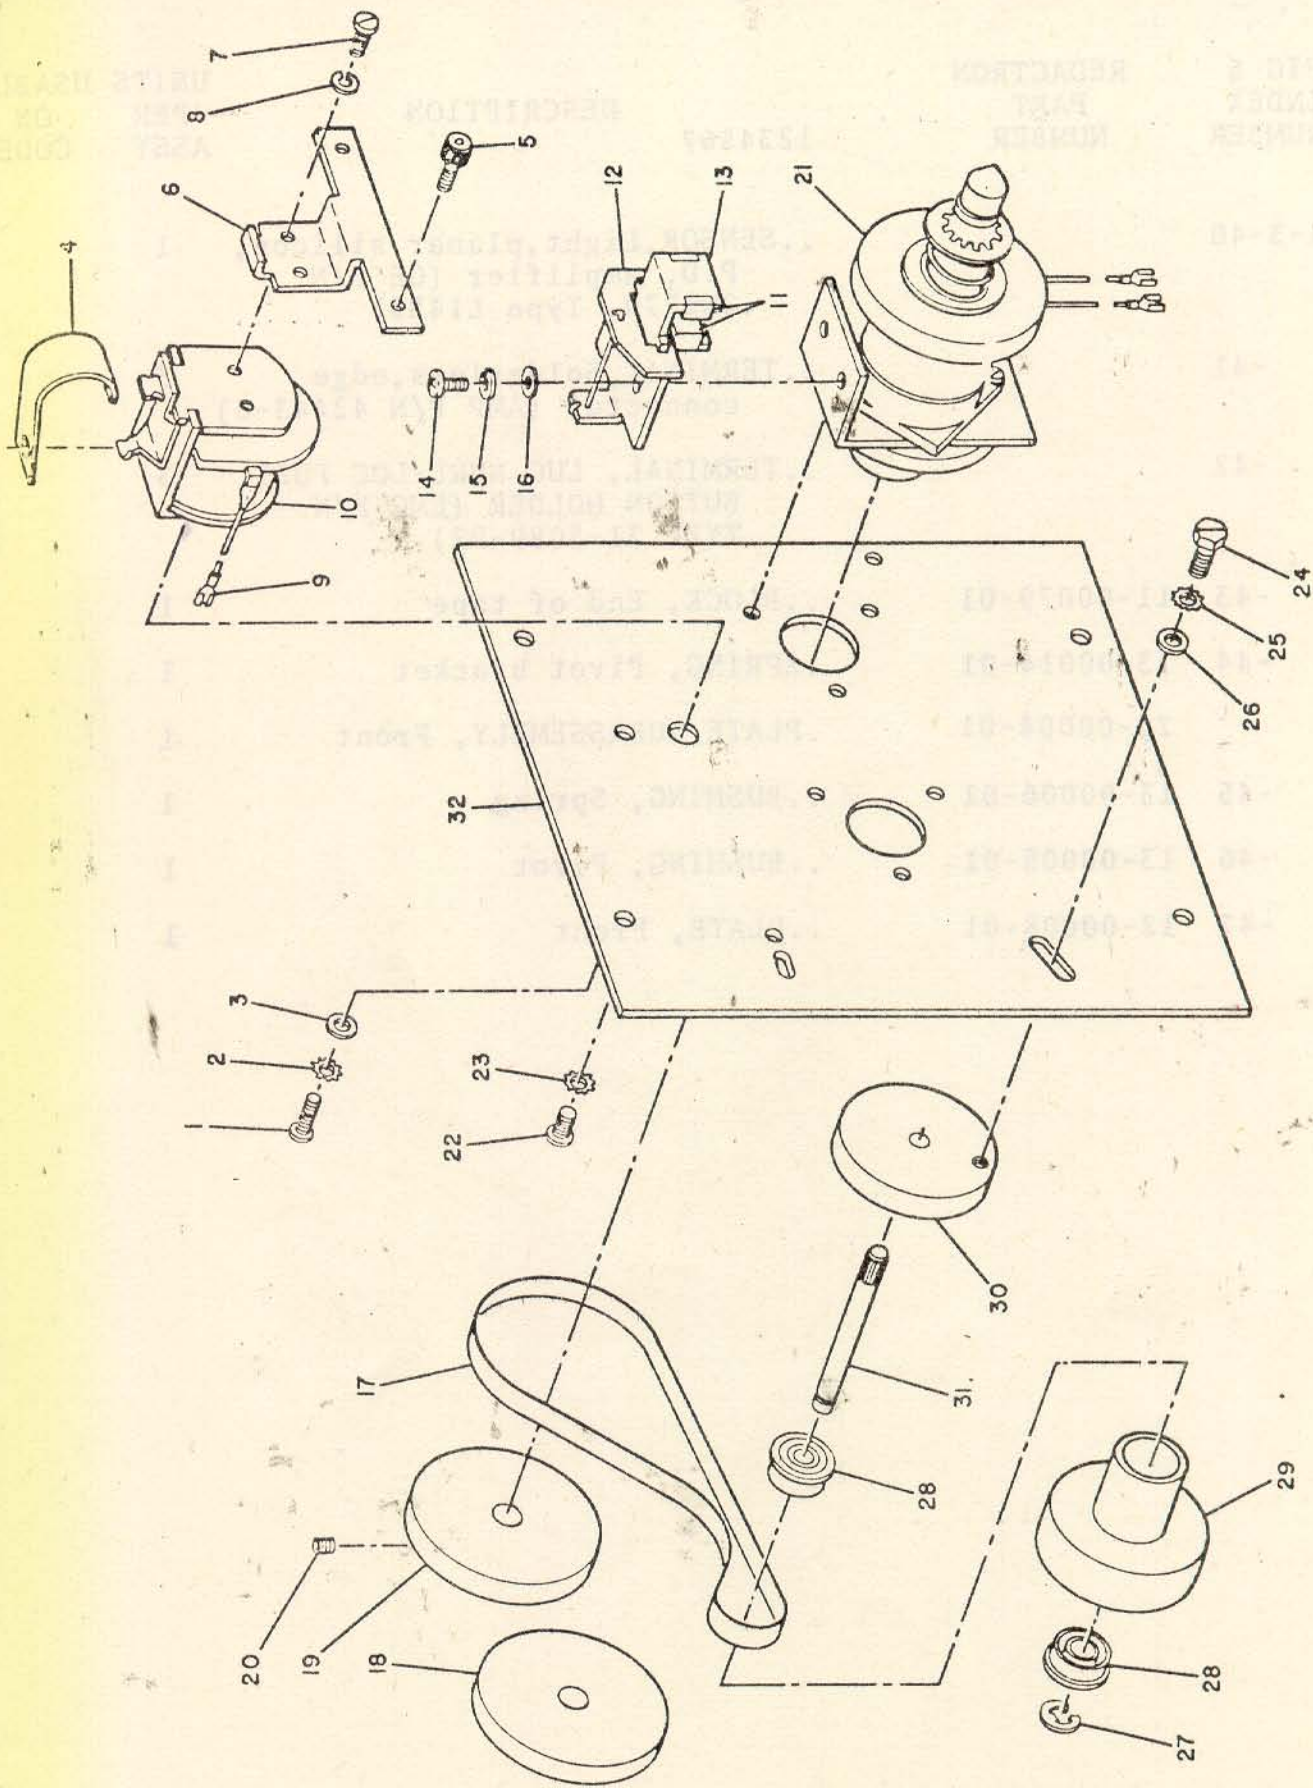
Bearing Plate Assembly, Cassette Transport
